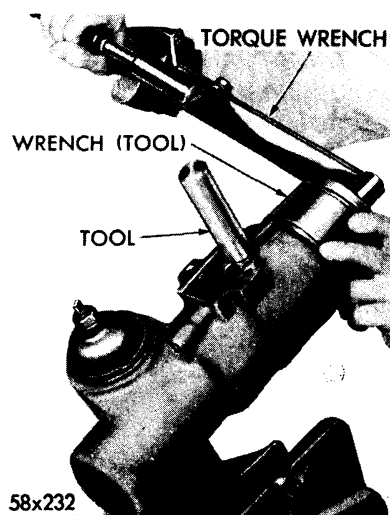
Alignment of Bearing Spacer and Center Bearing Race with Aligning Tool C-3649
